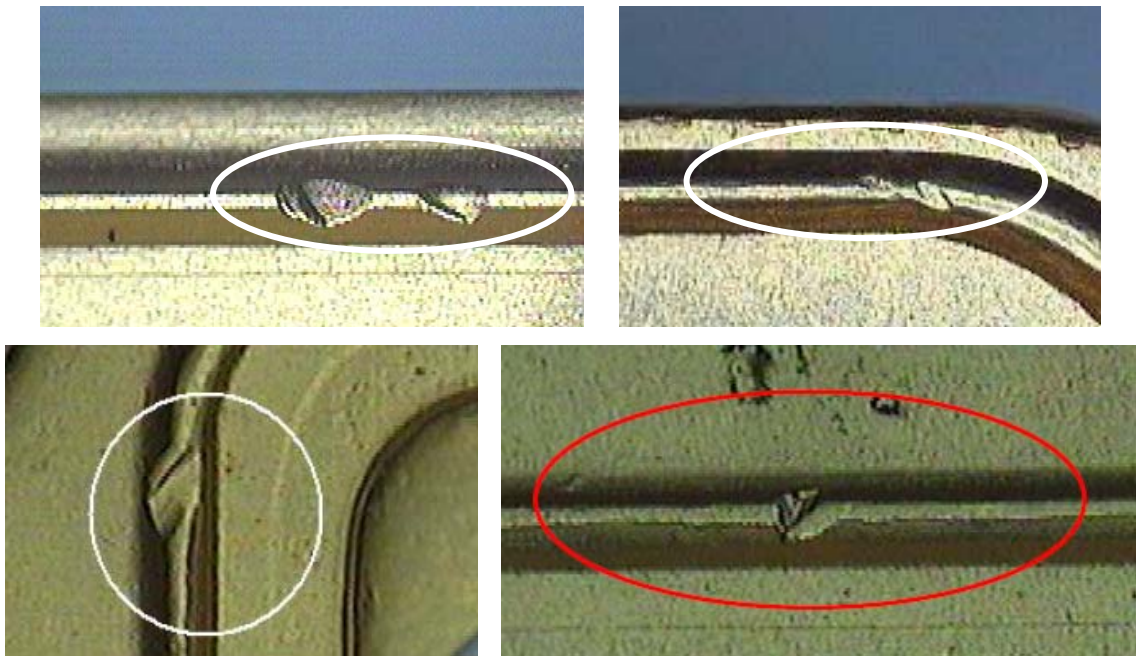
Nicks, pits, voids, and indentations on projection-weld cover critical seal areas
